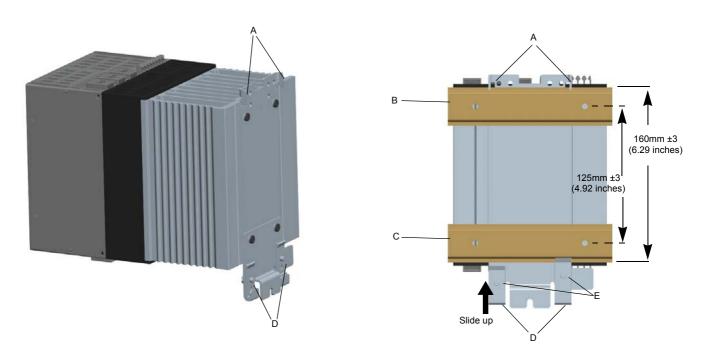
DIN rail mounting (32A unit shown; 63A units similar)
